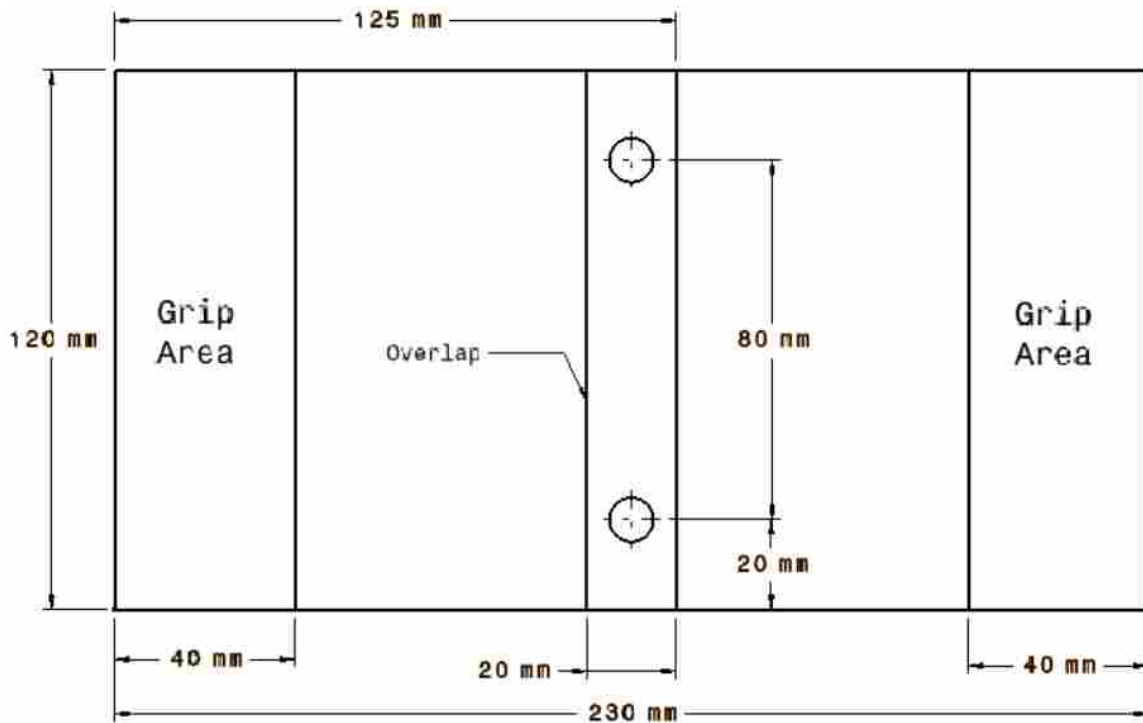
2 Weld, 80mm Spacing on 120mm Wide Lap-Shear Specimens
